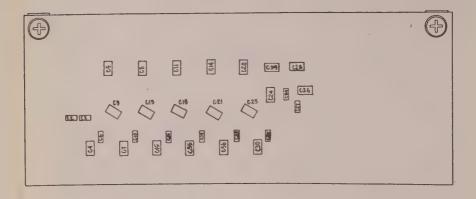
MODELS 6242A/6244A A4, 512 MHz ÷4 PRESCALER PC ASSEMBLY #06726301 Rev B
